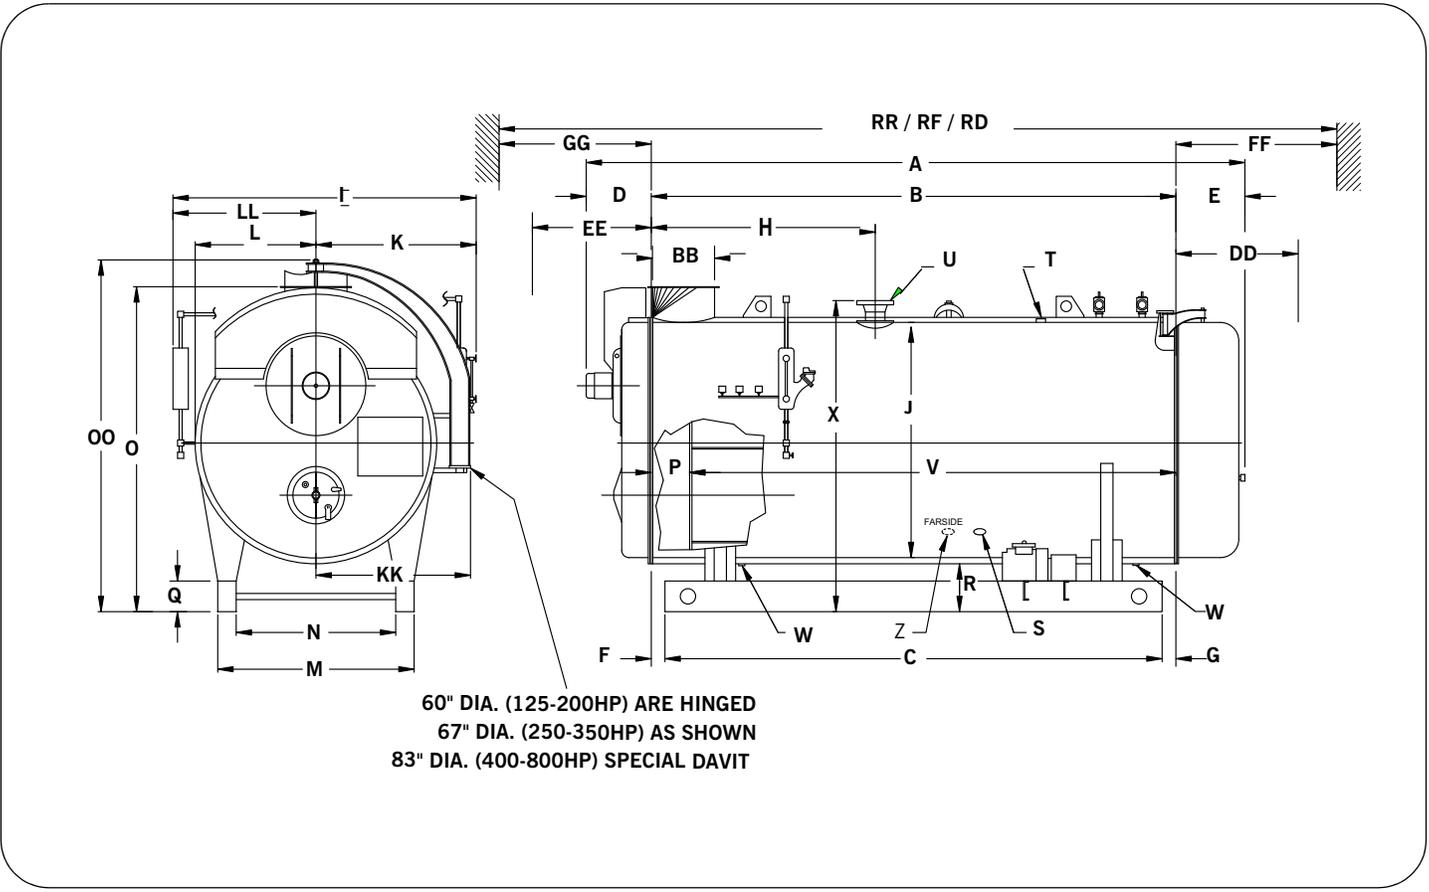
Model CBR Steam Boiler Dimensions and Weights - Sheet 1 of 2
